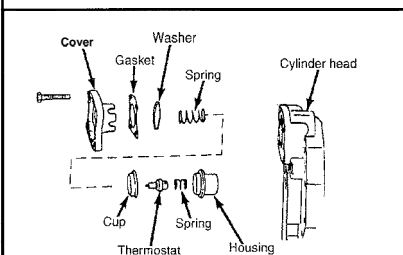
Exploded view of the thermostat assembly-120-140hp (2000cc) 90LV4 and 2501300 hp (4000cc) 90LV8 motors
